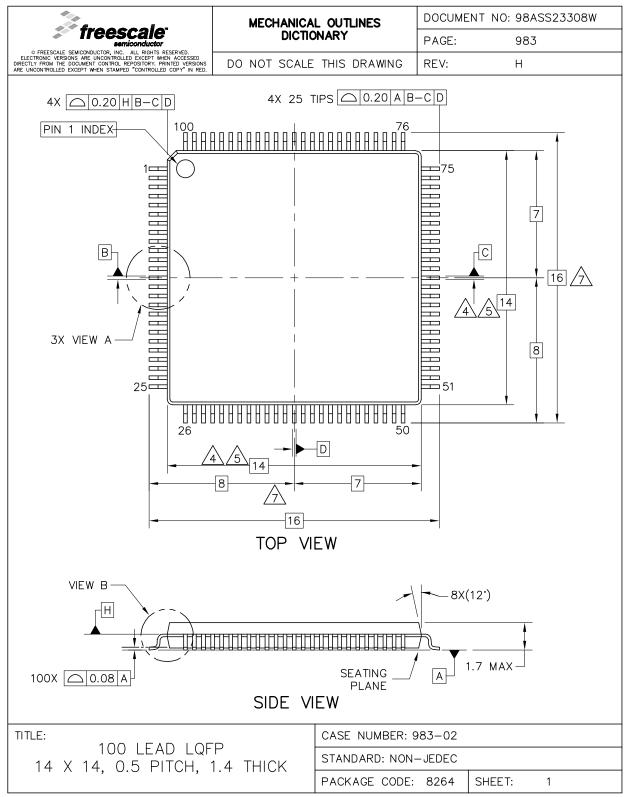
100 LQFP package mechanical drawing (1 of 3)
